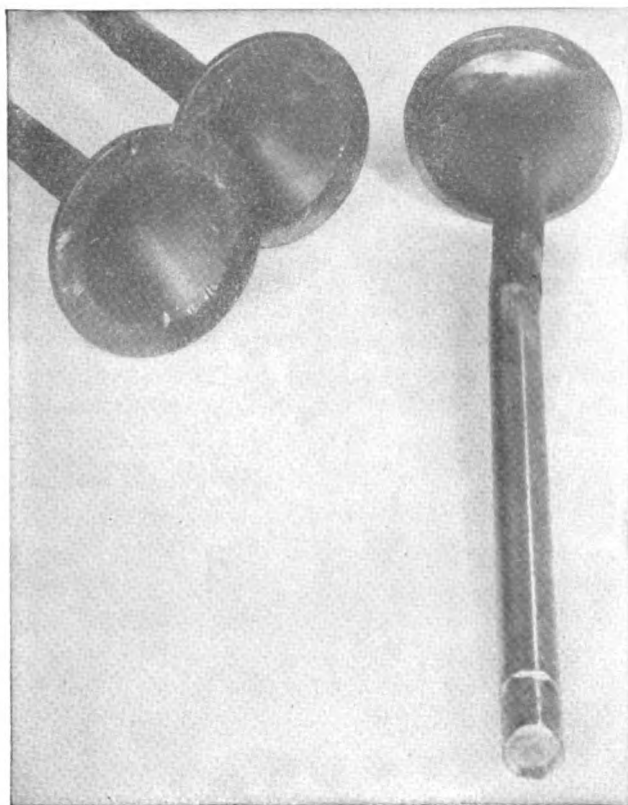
Damaged valves from cylinder head shown in Figure 12-7A. Broken valve that caused damage is not shown.
